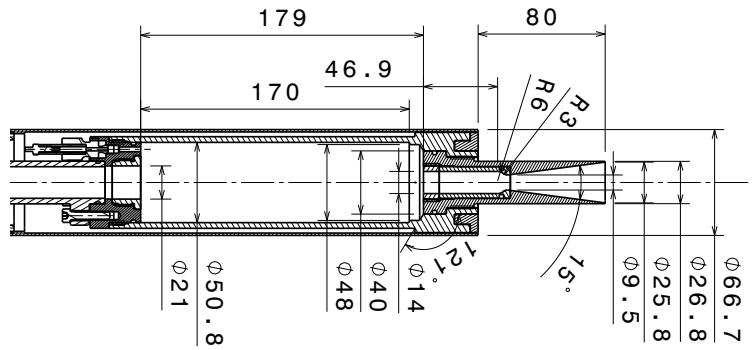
Technical drawing focusing on the chamber and nozzle geometry. Units are given in millimeter.
